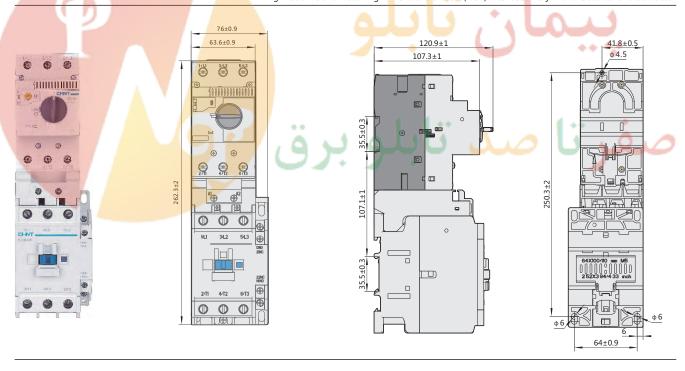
Outline and Installing Dimensions of CC-3(NS2) after assembly with the starter and contactor
